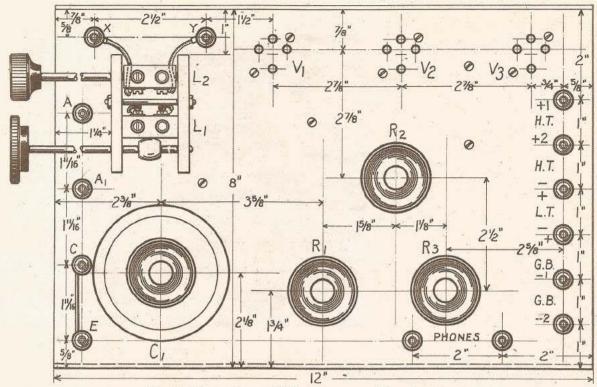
Front of panel drilling diagram. Blueprint 68a.
